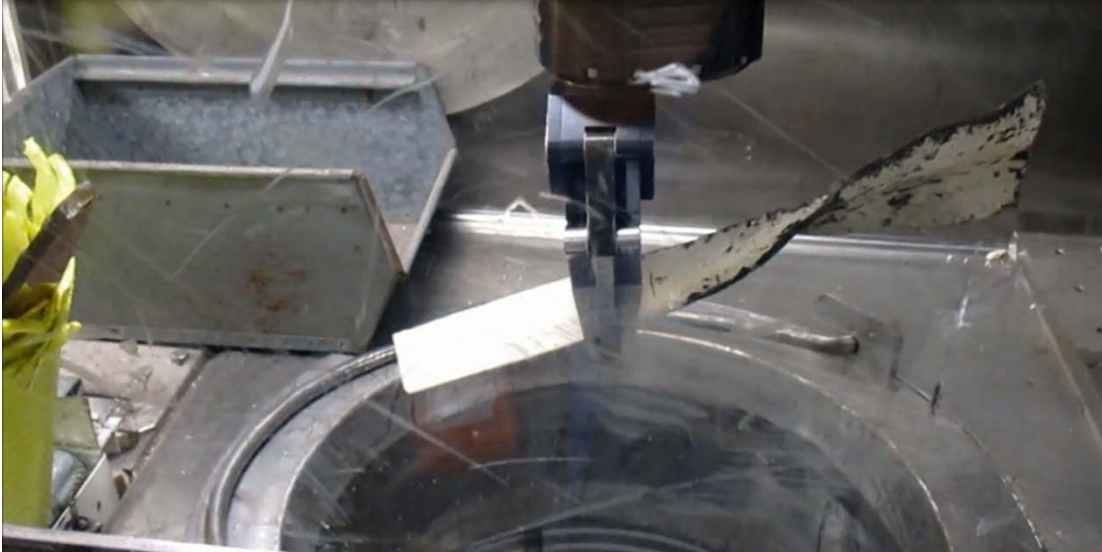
Manipulator consigning cropped metal waste to PCM drum (video still)
